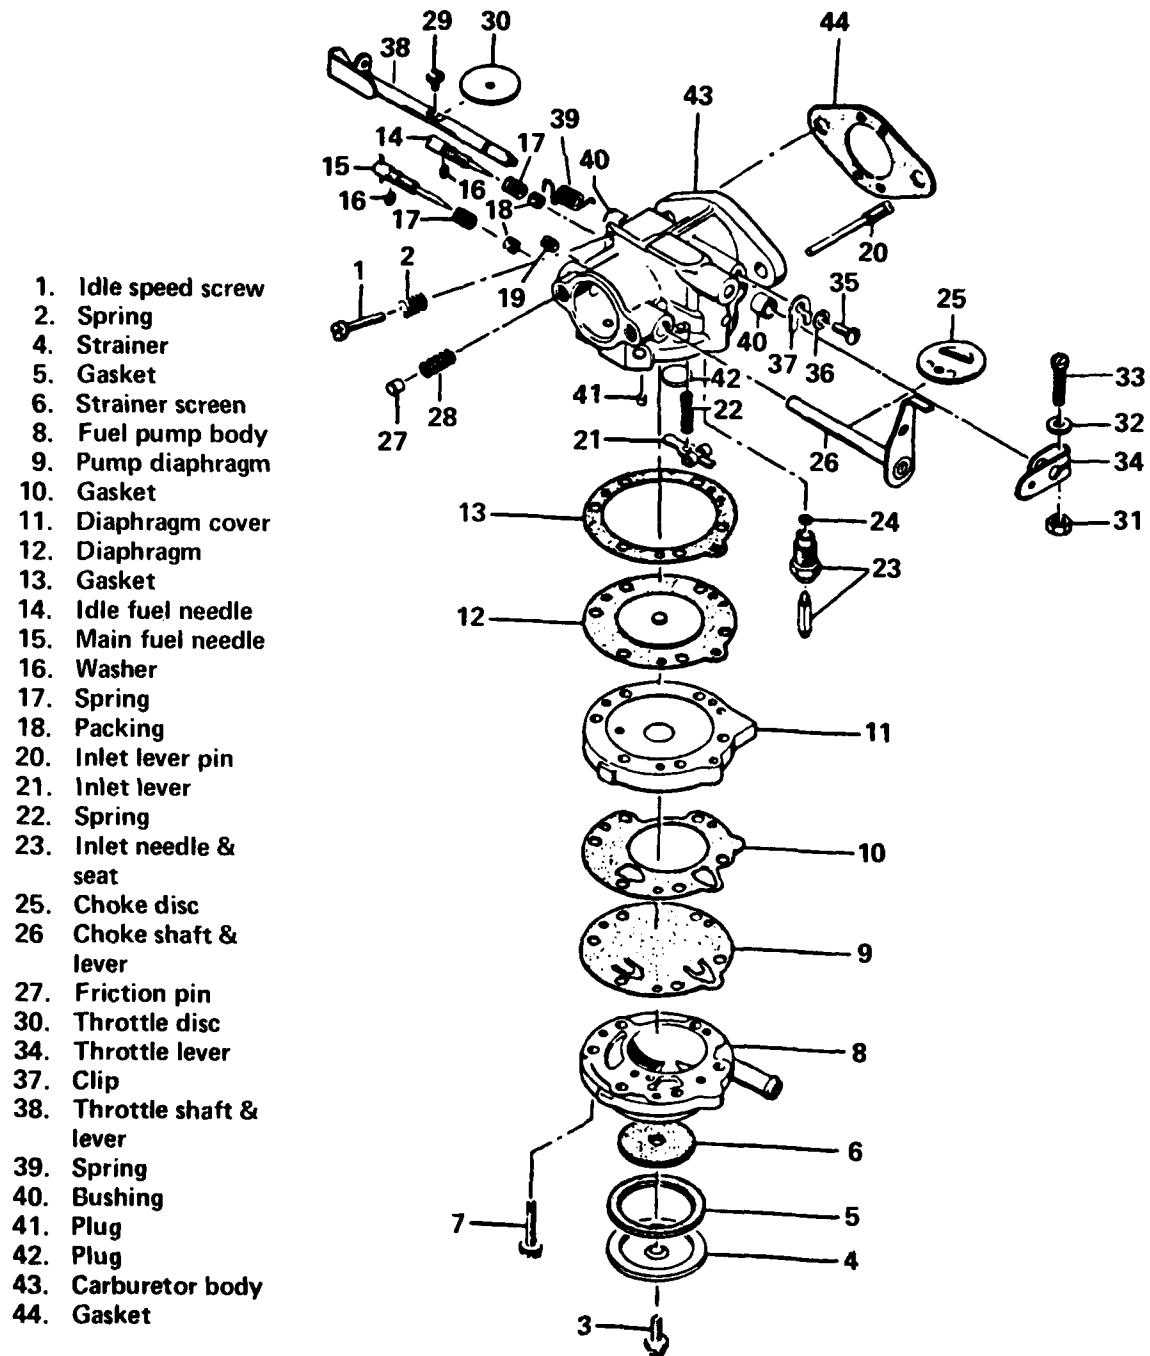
EXPLODED VIEW OF TILLOTSON CARBURETOR.
